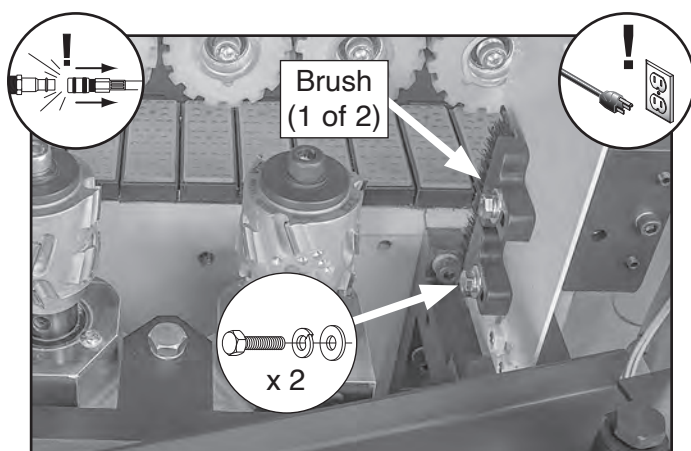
Location of cutterhead brushes (cutterhead guard removed for clarity).
